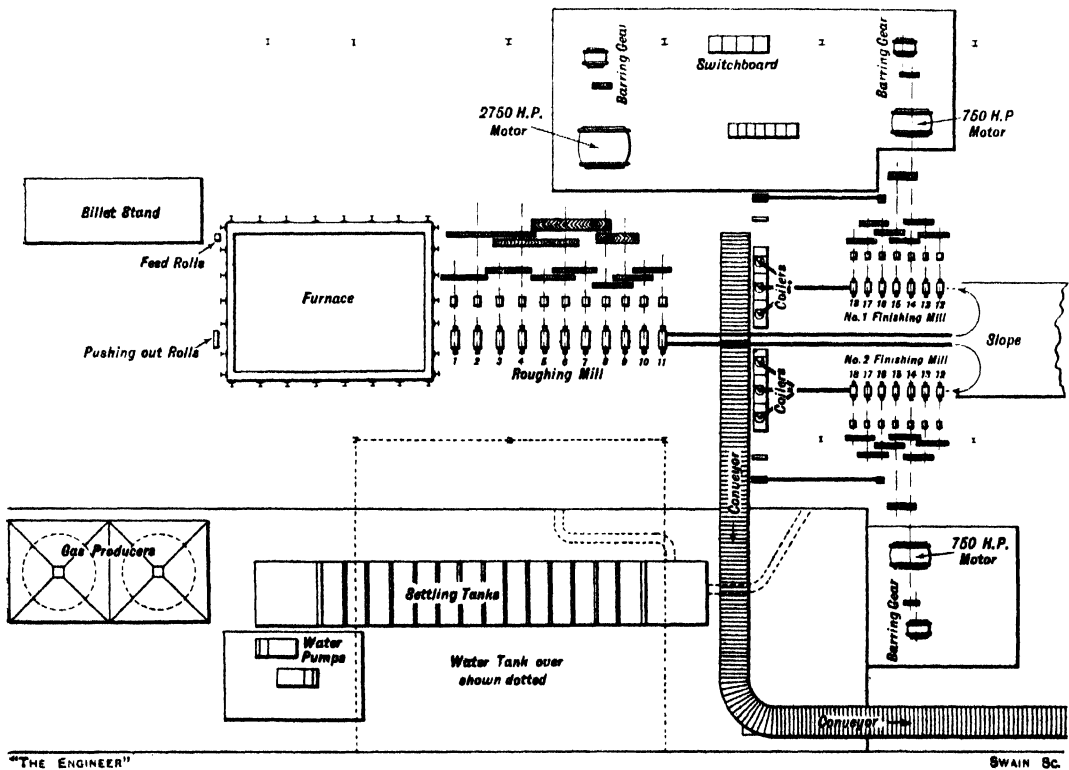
GENERAL ARRANGEMENT OF NO. 5 ROD MILL.
